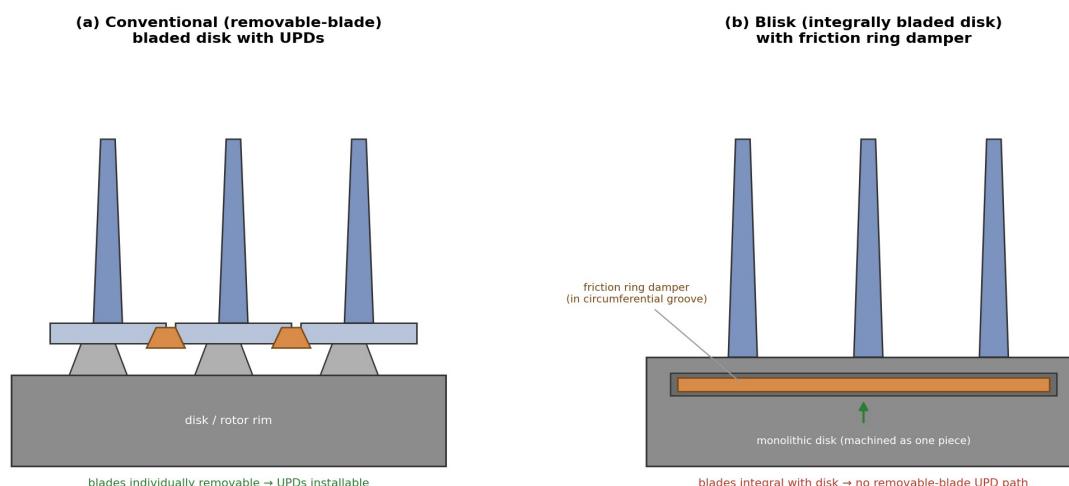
Structural comparison between (a) a conventional bladed disk with individually removable blades, permitting UPD installation between adjacent platforms, and (b) a blisk (integrally bladed disk), whose monolithic construction eliminates the removable-blade interface a conventional UPD requires, motivating alternative friction-damping concepts such as the friction ring damper shown installed in a circumferential groove beneath the blisk rim.
